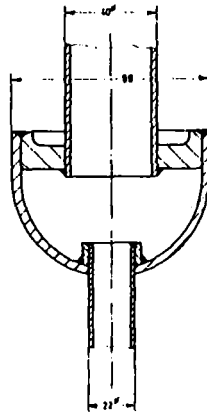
Cross Section of the Cooling Water Manifold
